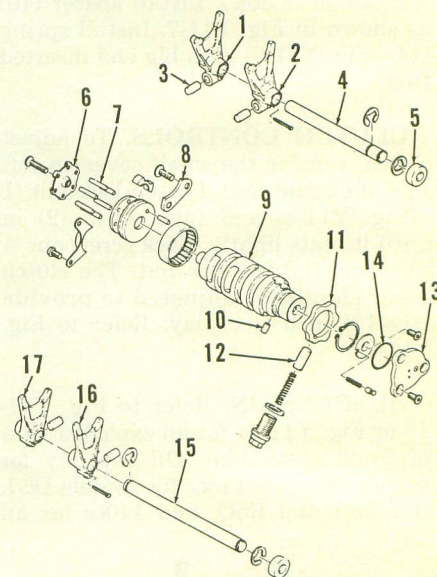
Exploded view of shifter assembly. Shift fork (17) is only used on six speed models.
